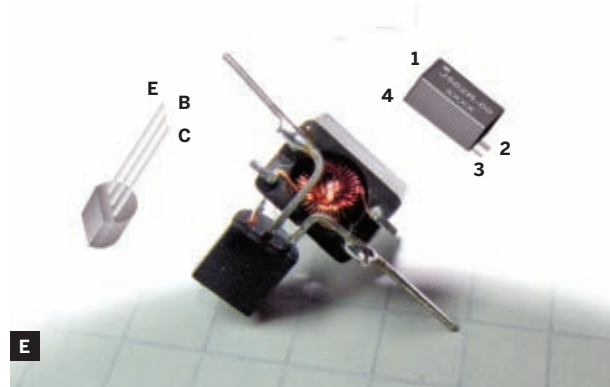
Fig. D: Solar battery with the Schottky diode and supercap soldered in. Fig. E: Solder the transistor collector (C) and base (B) to pins 2 and 4 of the transformer. Fig. F: Solder the resistor between pins
